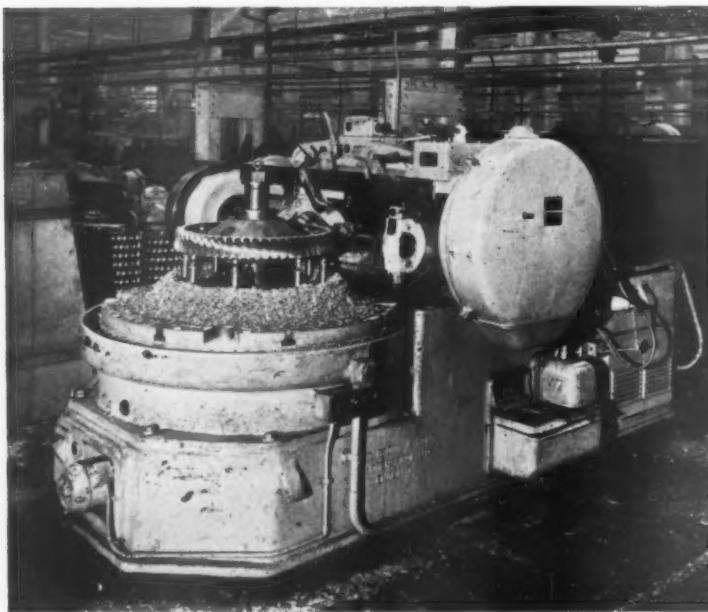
Hobbing industrial worm-wheel on wormwheel generator.
